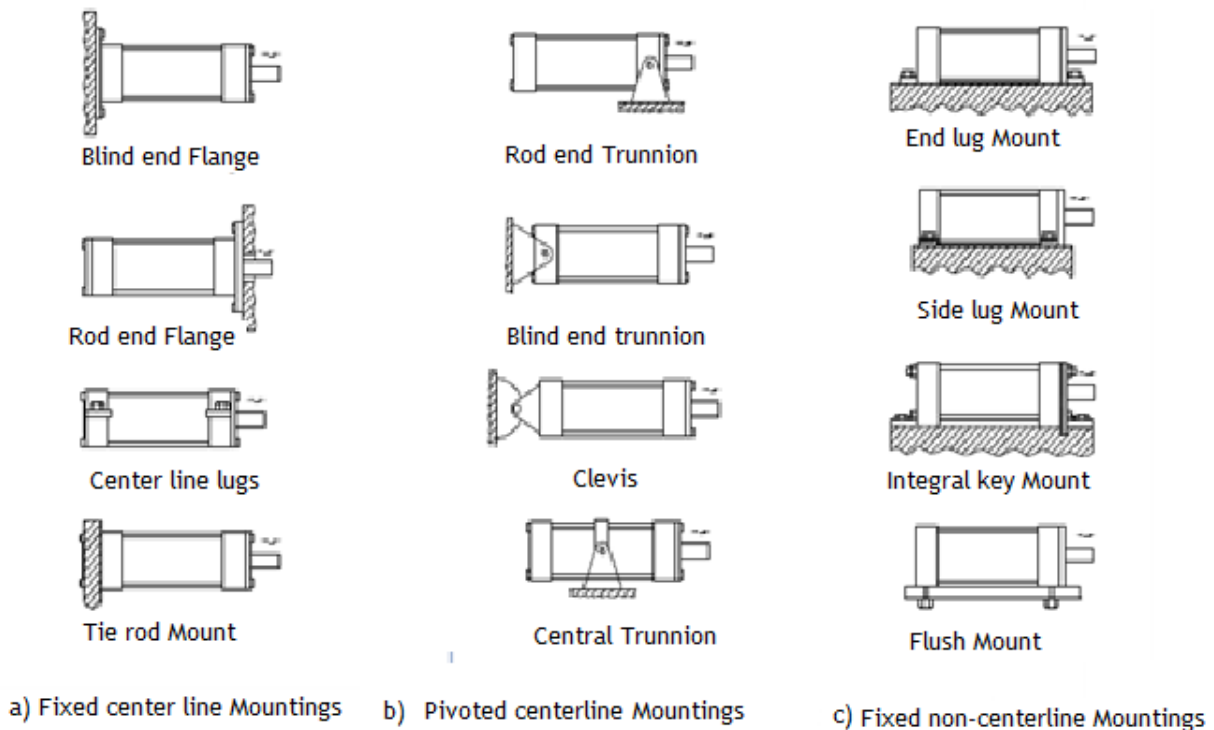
Types of mounting a) Fixed centreline b) Pivoted centreline c)
